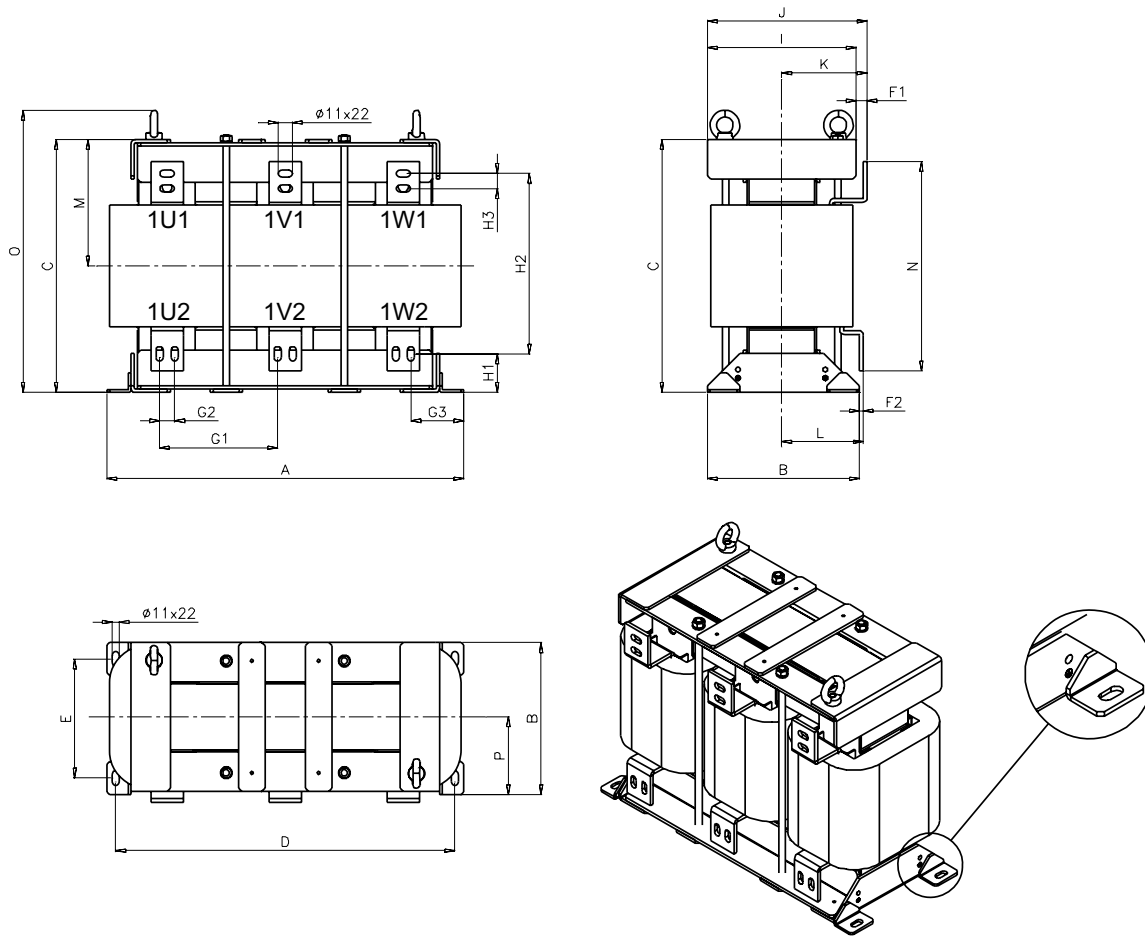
Dimension drawing of line reactor 6SL3000-0EE41-4AA0
